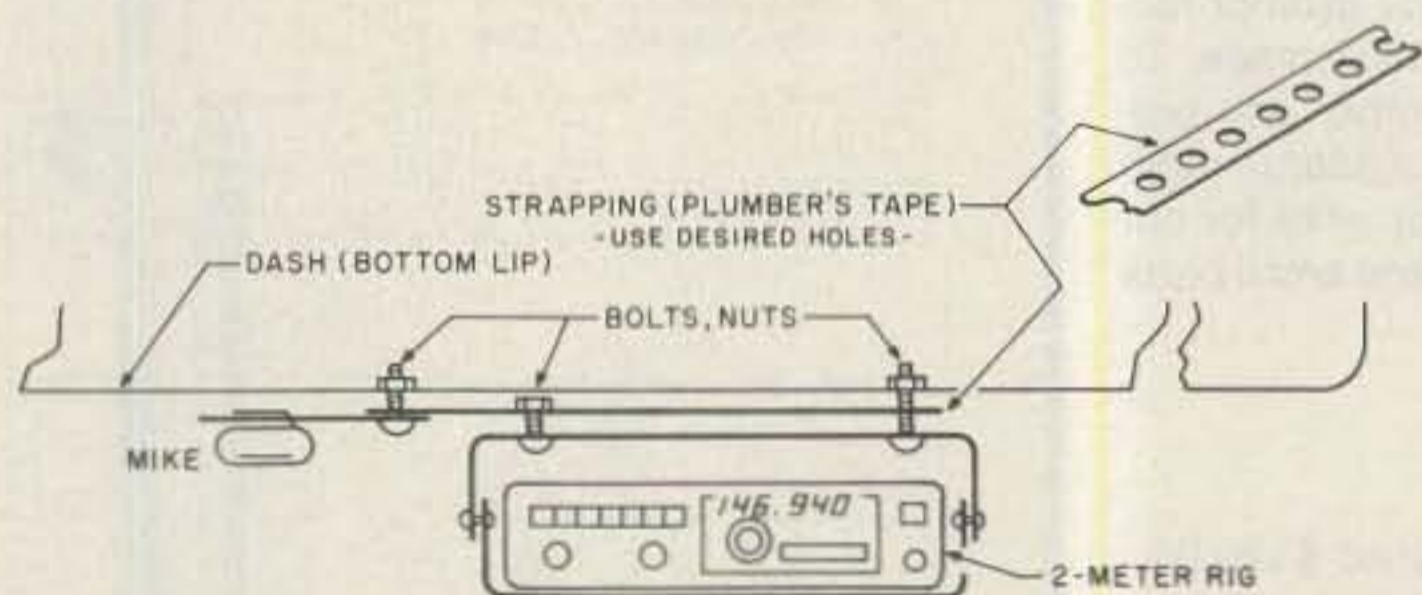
Method of using strapping to mount a rig under the dash, using existing holes. Screw and nut sandwiched between the dash bottom; strapping should be short and thin for snug mounting and to prevent scratching the rig. The mike holder can be screw-mounted to one of the holes in the strapping.
